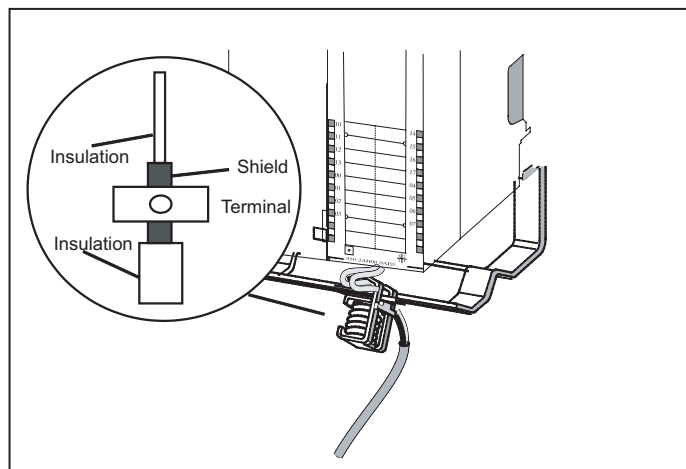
Connecting the Shielded Cables to the FM 350-2
